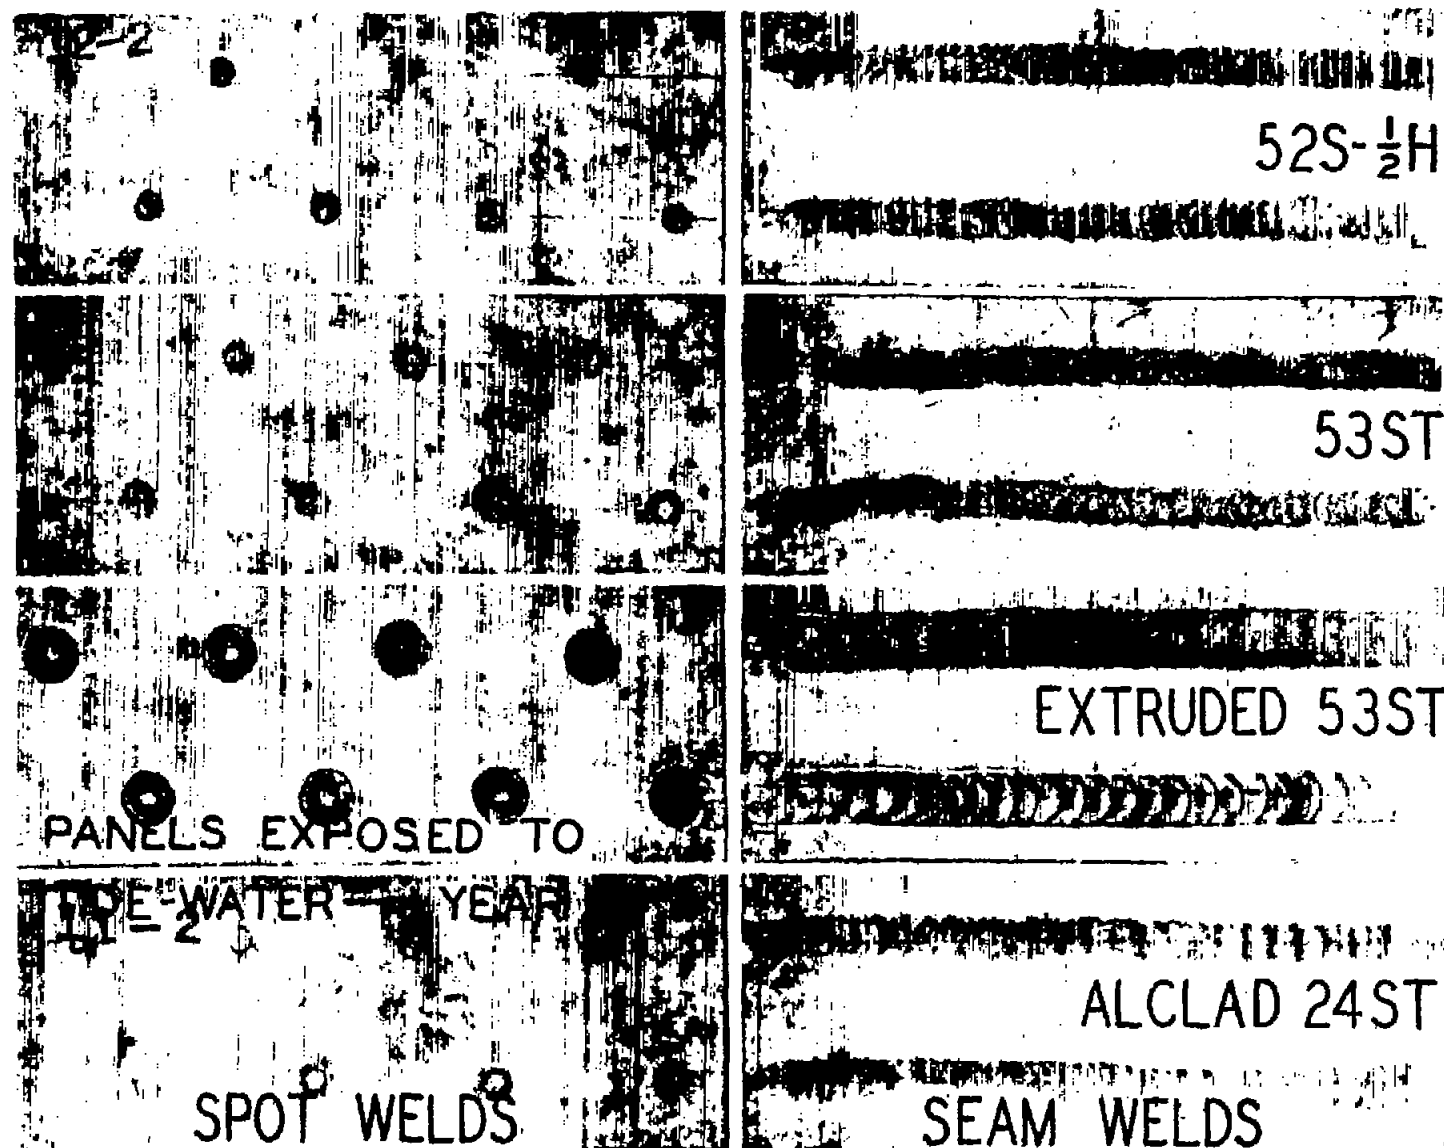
Welded aluminum-alloy panels exposed to tidewater. The seam welds are somewhat more attacked than the spot welds, the worst corrosion being present on the 53ST sheet alloy. The dark color of some of the welds was caused by the copper electrodes used for welding. $\times 1$
